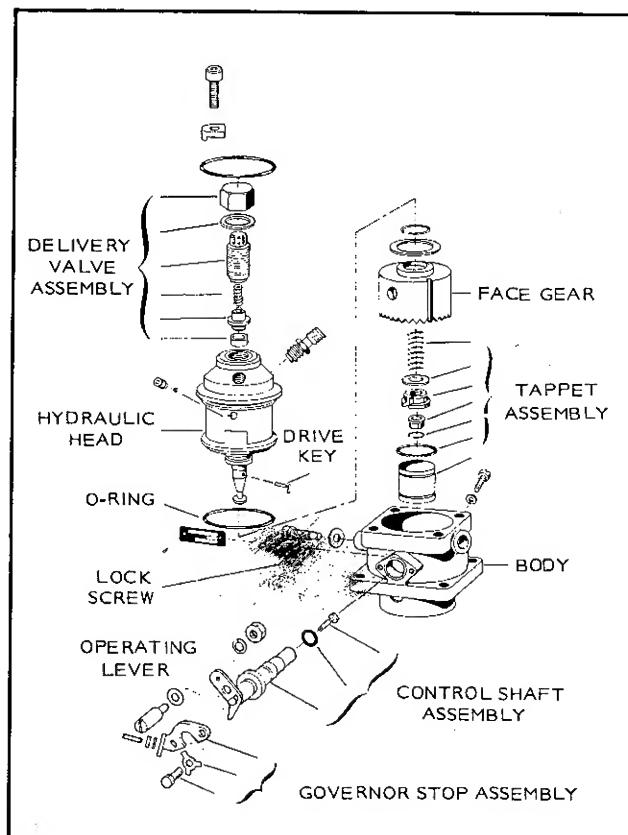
PSU PUMP (EXPLODED VIEW)
